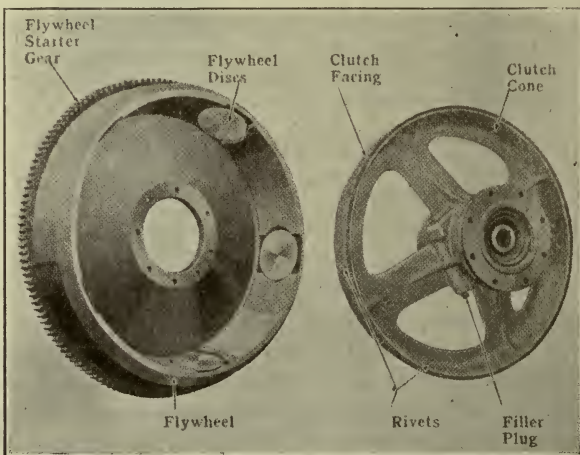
Marmon Cone Clutch and Fly Wheel.
